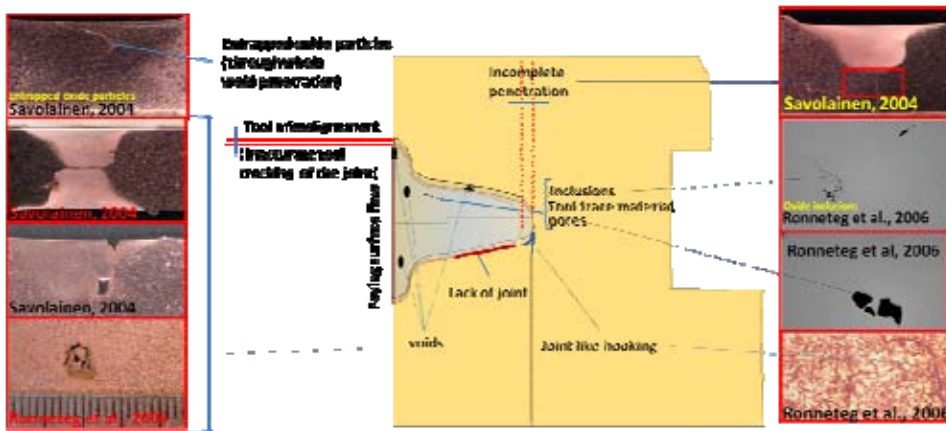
Possible defect types in friction stir welding and found defects in metallographic studies.
